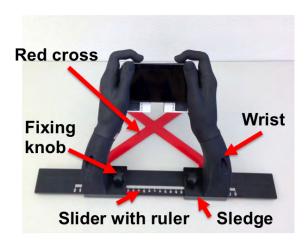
Fixture SHO-FX-HOTV4 parts.
